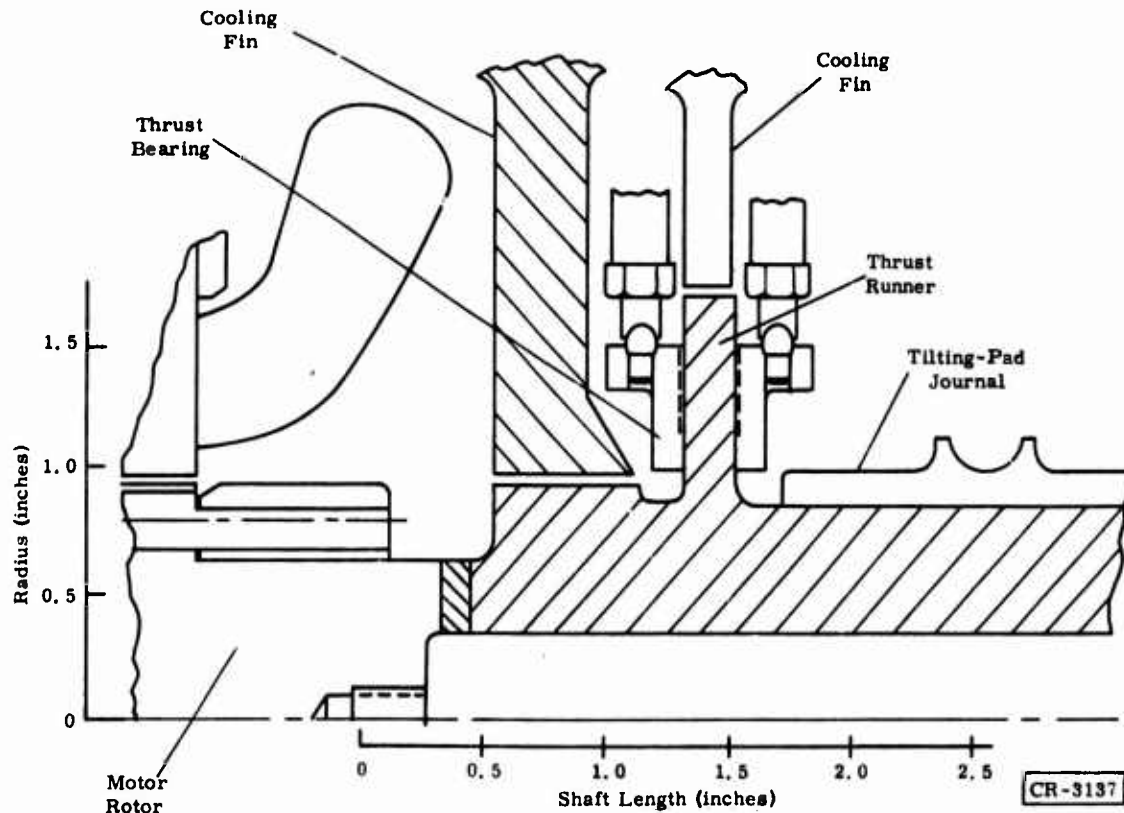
Compressor Shaft Thrust Bearing Heat Transfer Model
